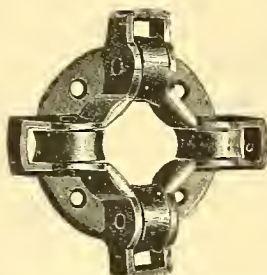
QUARTETTE BELL-CORD BUSHING.
